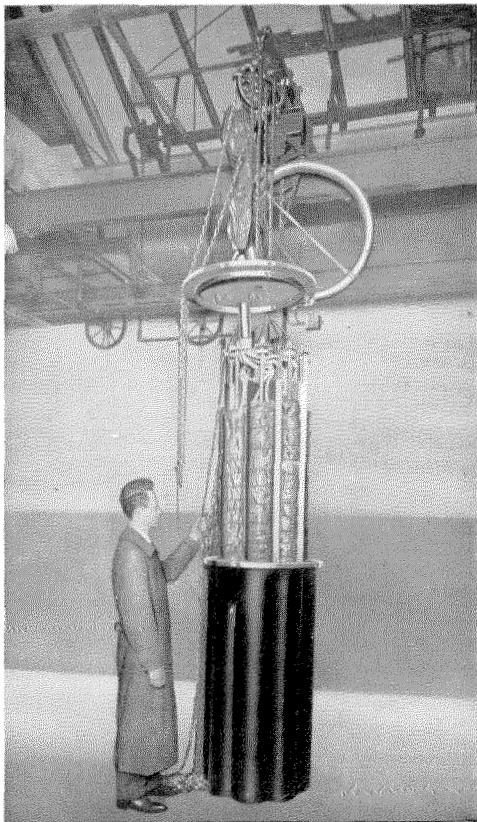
Assembly of 300-coil Case. Lowering Loading Coils Into Case After Coil Spindles Have Been Mounted on Frame and Coil Terminals Spliced to Stub Cable Conductors
